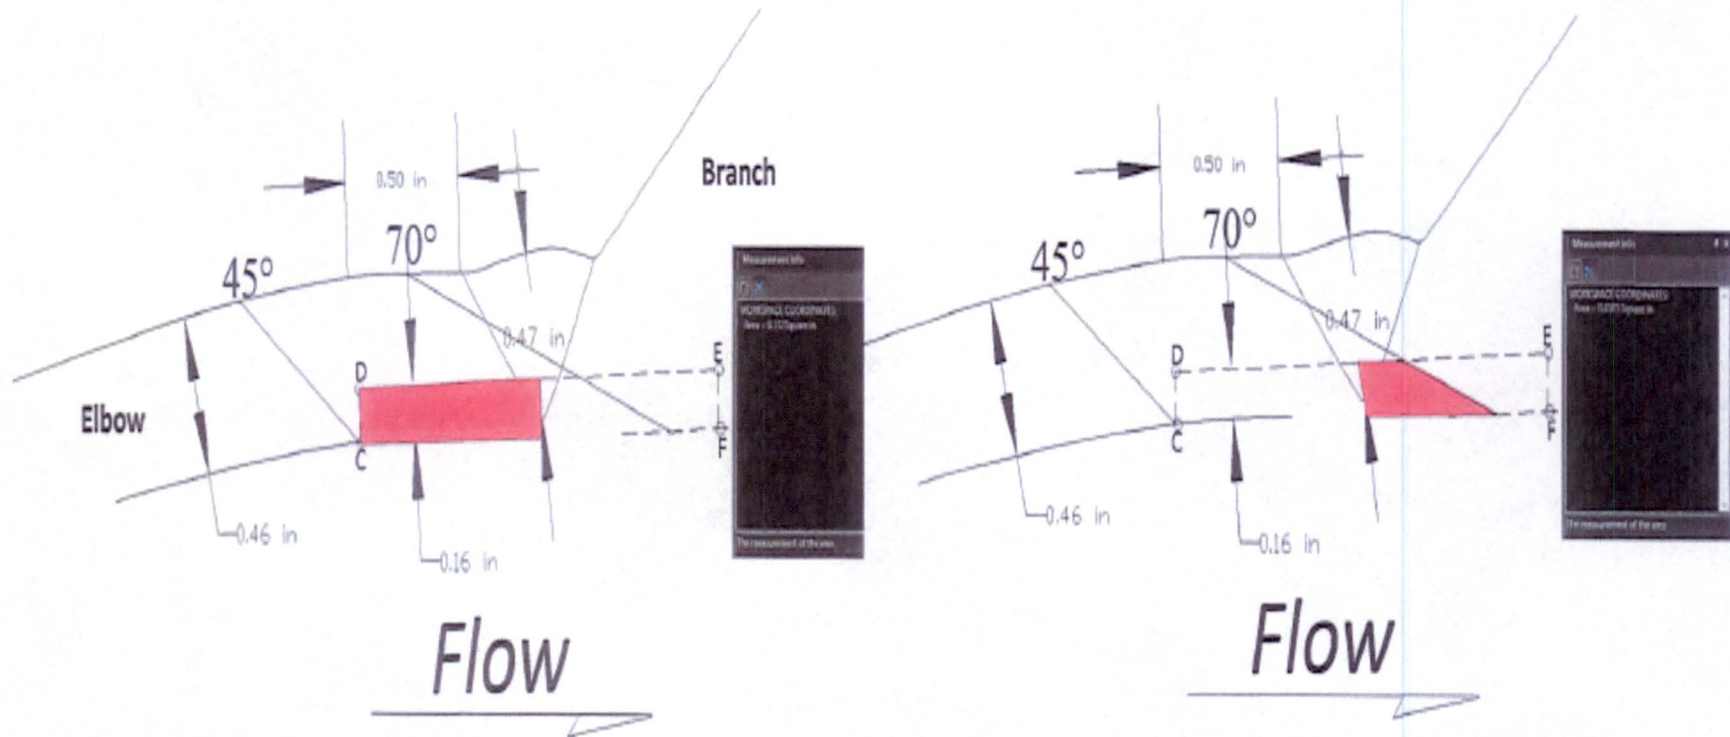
Weld 1-CS-96-60F (Extracted from Reference DRAWING A-75)
